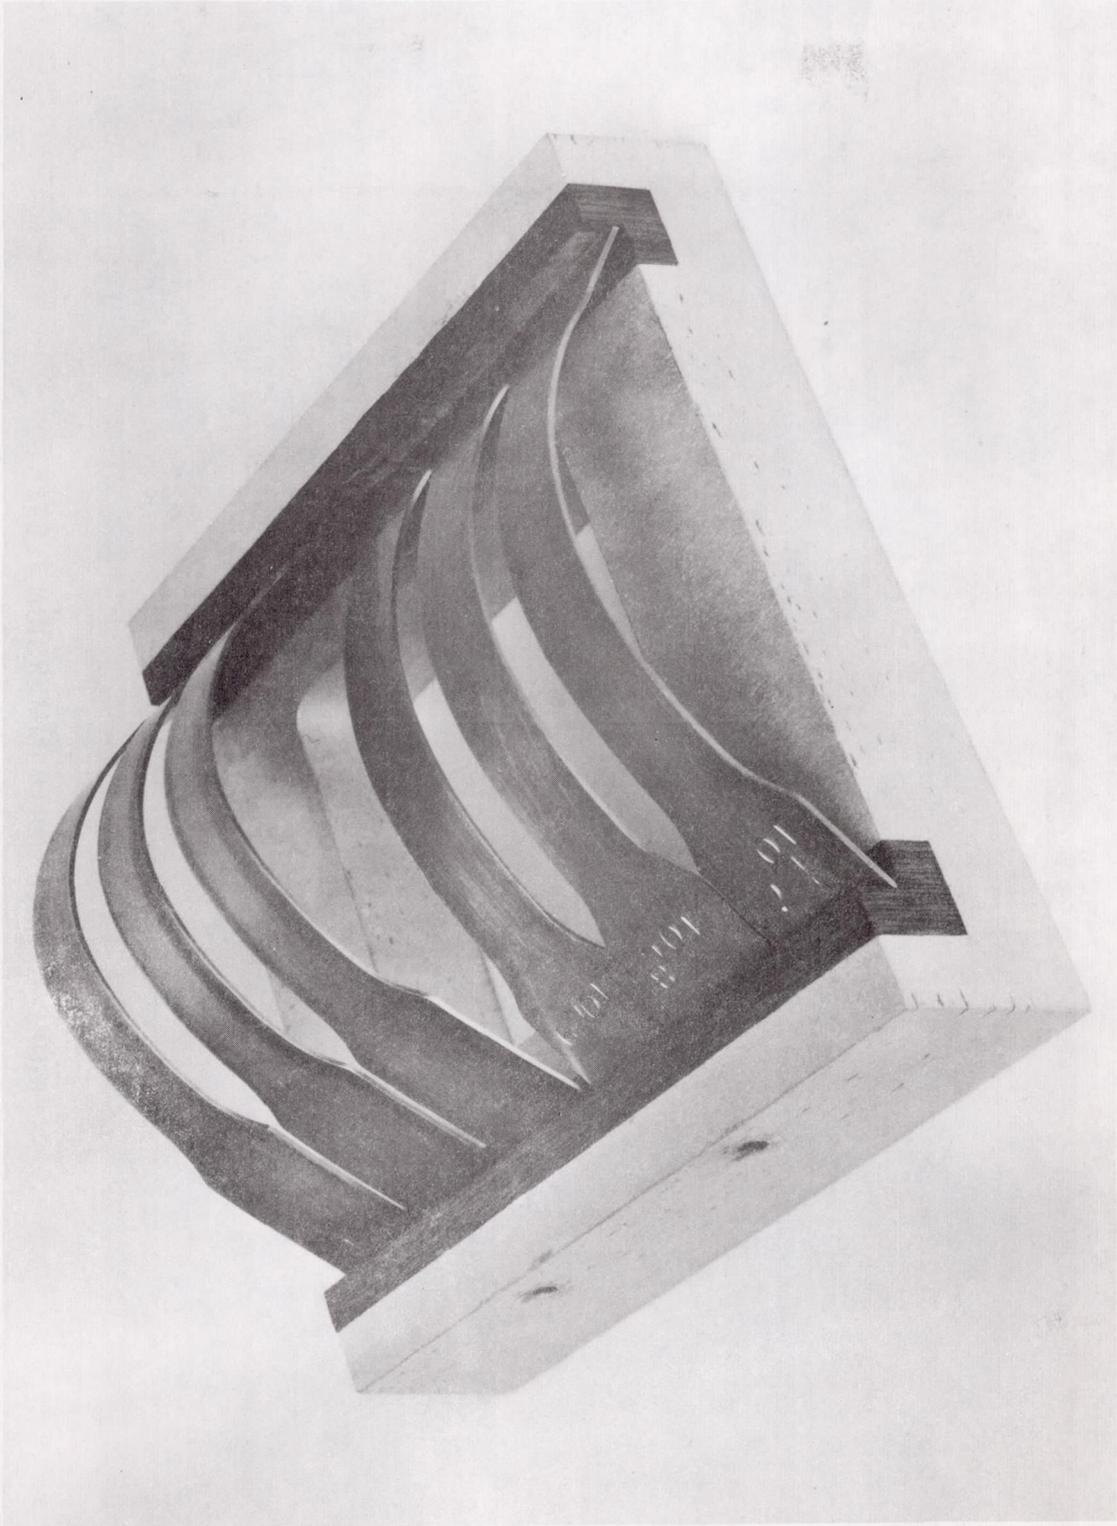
FLAT TENSILE SPECIMENS LOADED IN A CONSTANT SPAN FIXTURE
